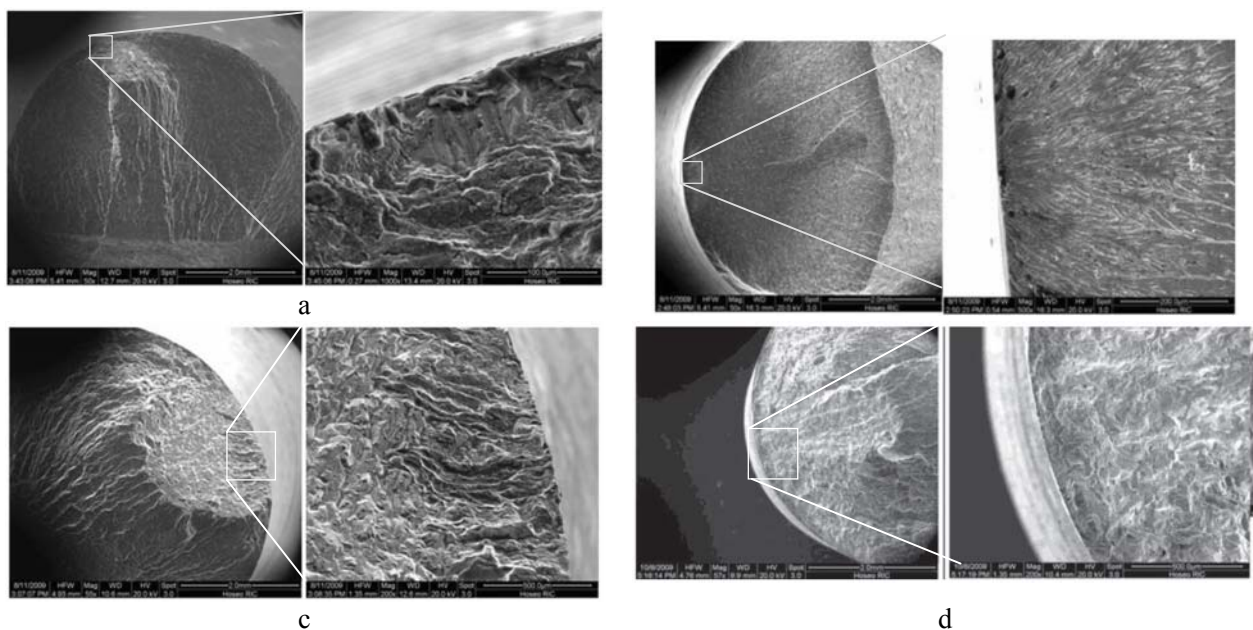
Untreated (a-c) and UNSM treated (d) Al6061-T6 specimens fracture surfaces
